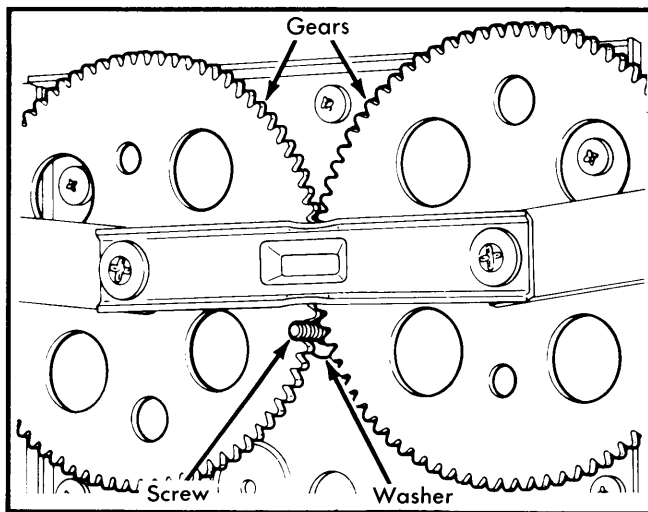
Jeep Locking Window Regulator Gears Cherokee & Wagoneer
